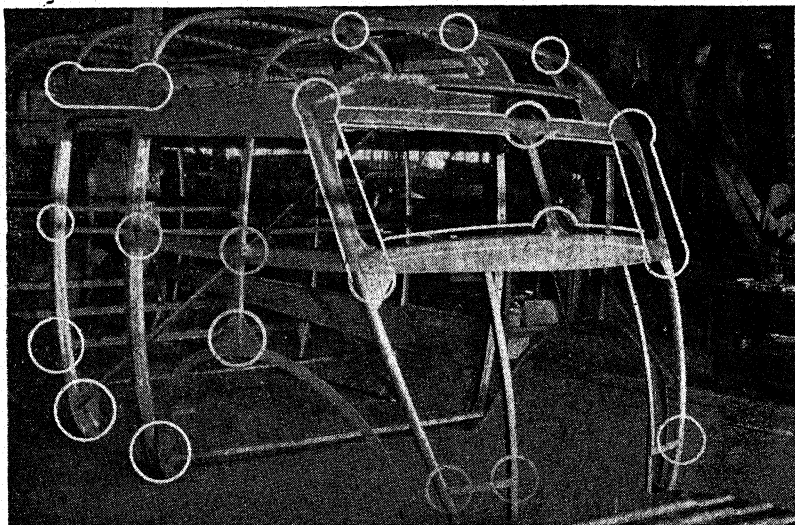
Front-end frame work of bus. Circles indicate arc welded joints.
